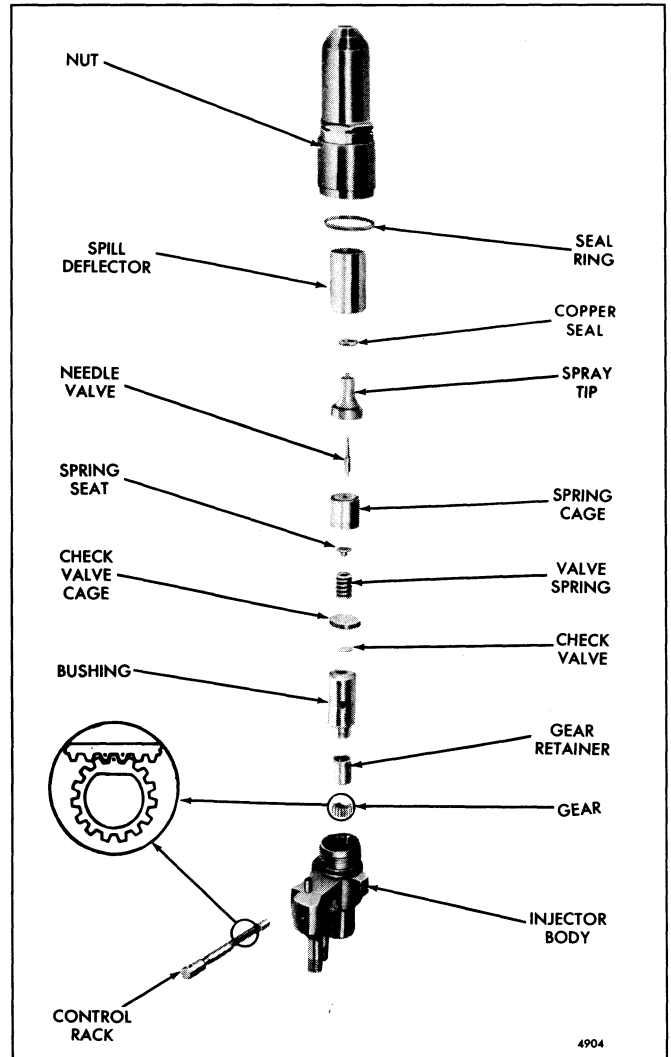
Injector Rack, Gear, Spray Tip and Valve Assembly Details and Relative Location of Parts
